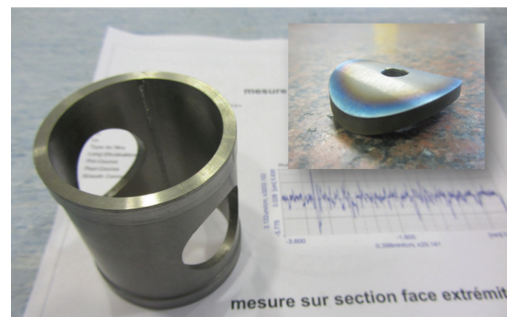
Welded specimens for qualification of the full-penetration weld between the hook and the niobium corona.
